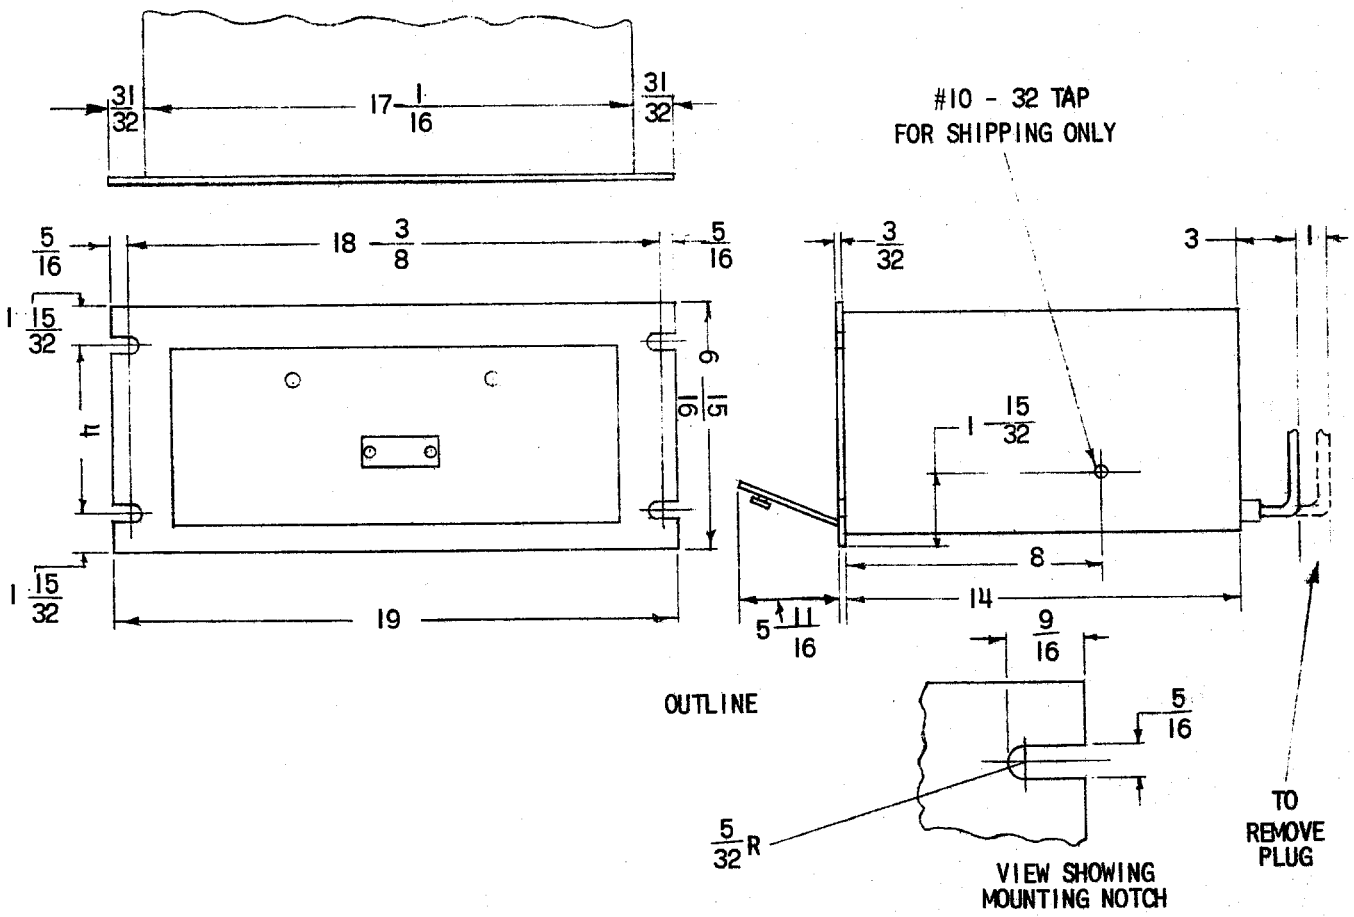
(0227A2037-0) OUTLINE AND MOUNTING DIMENSIONS FOR THE TYPE SLA51D RELAY
